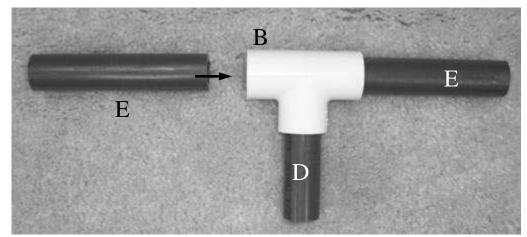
Assembly of the Small Wheelchair (Step 4).
